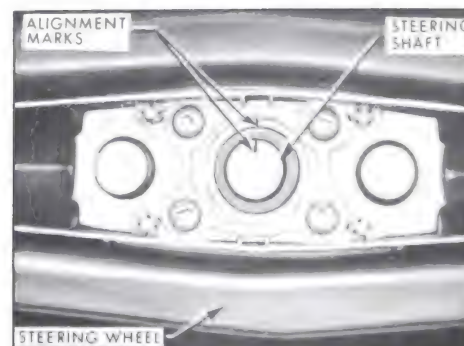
Steering Wheel and Shaft Alignment Marks
